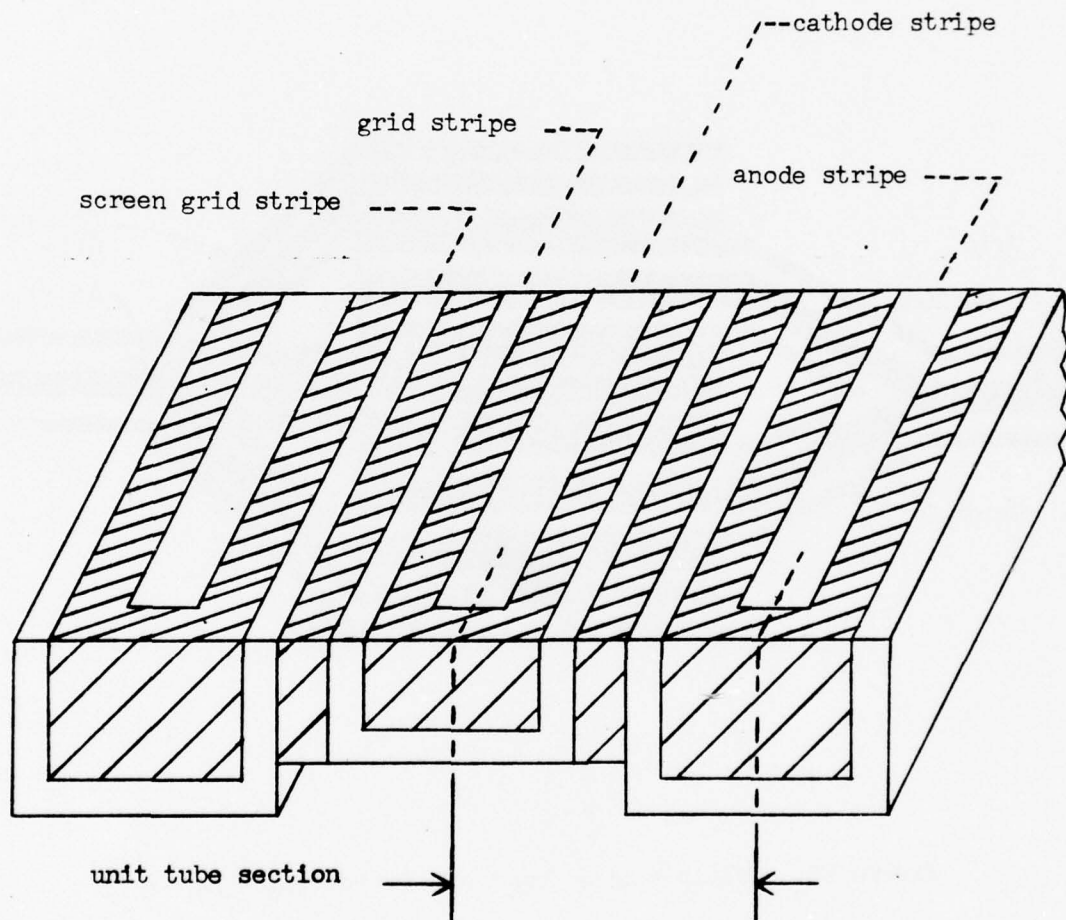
Trough Strip Line Tube Showing Two Tube Sections
